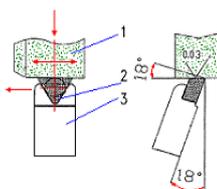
High finishing machining with abrasive stones. 1- abrasive stone; 2- metal working assembly; 3- knife support
